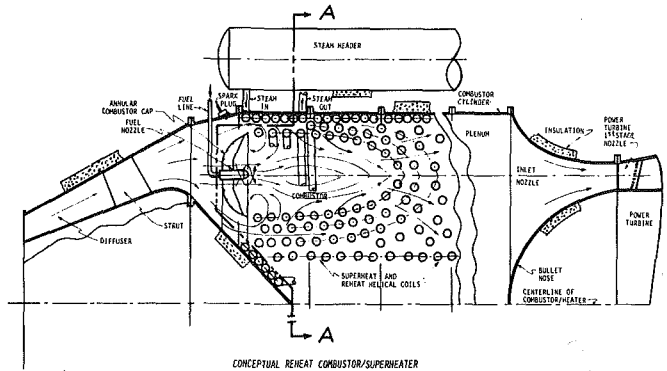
Sectional view of conceptual axial flow reheat combustor/superheater showing helical tube arrangement to form annular combustion cavity and to mix and distribute combustion/gas generator gasses
